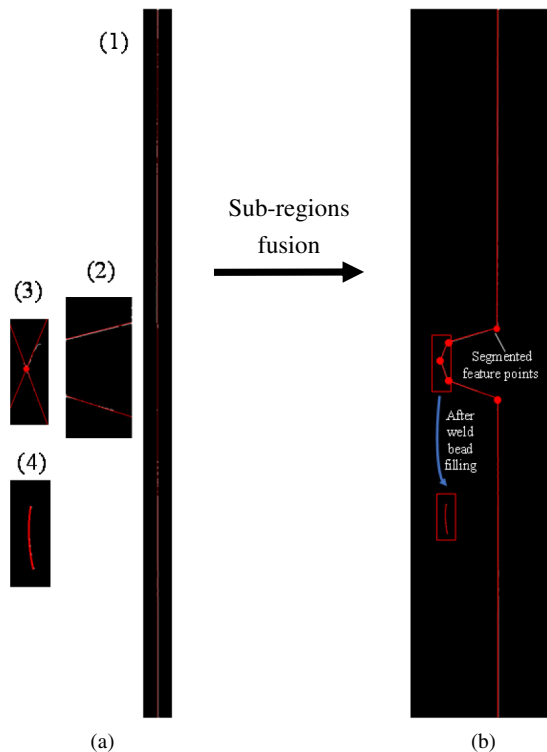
Fusion of sub-regions after image processing. (a) Sub-regions after image processing, (1)–(4) in (a): (1) ROI1, (2) ROI2, (3) ROI3 without weld bead filling, (4) ROI3 after weld bead filling; (b) Fused deformed laser centerline and its fitting line
